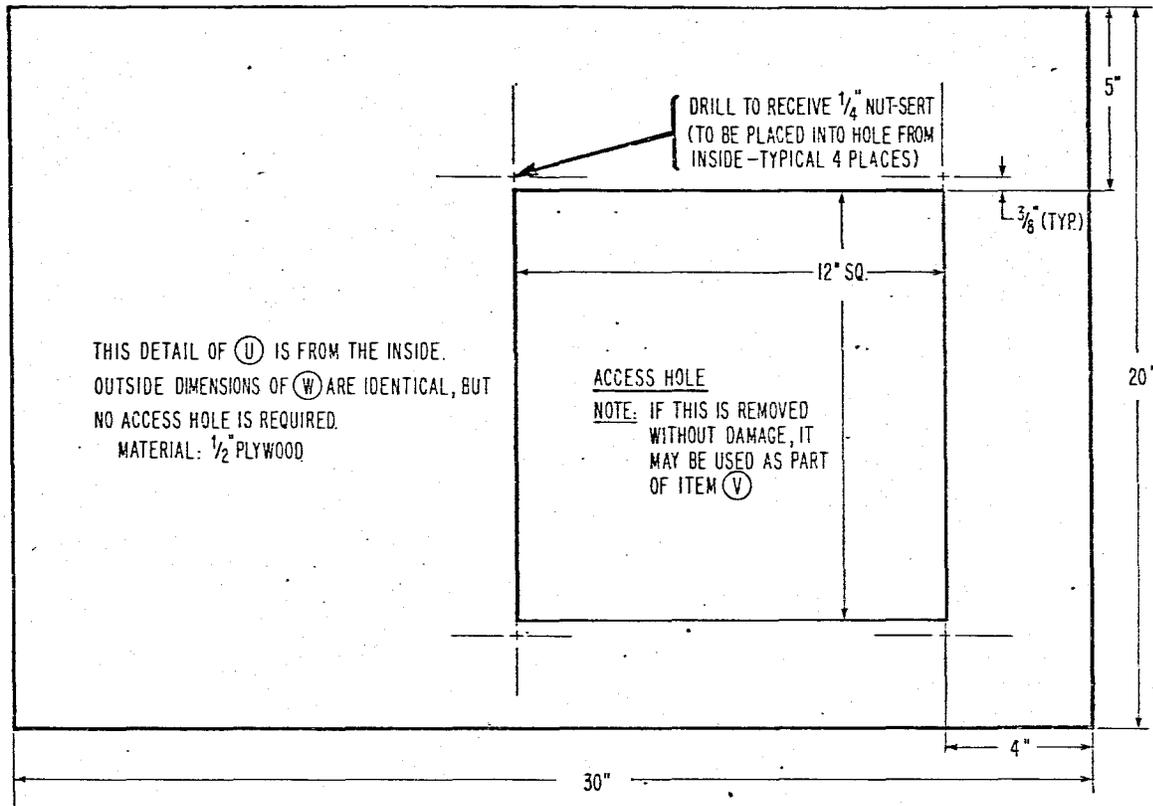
FILTER BOX BASE BOTTOM PANEL DETAIL
